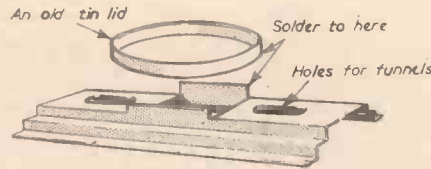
Removable covers for spirit reservoir and boiler compartments.
